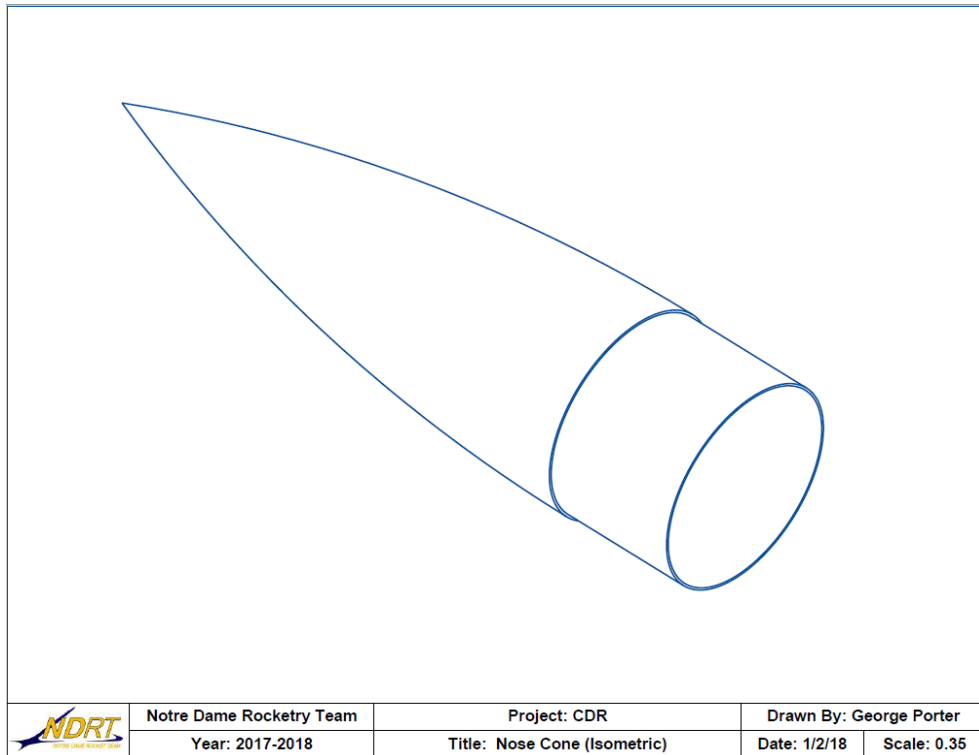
Isometric view of full-scale nosecone. Dimensions in inches.
